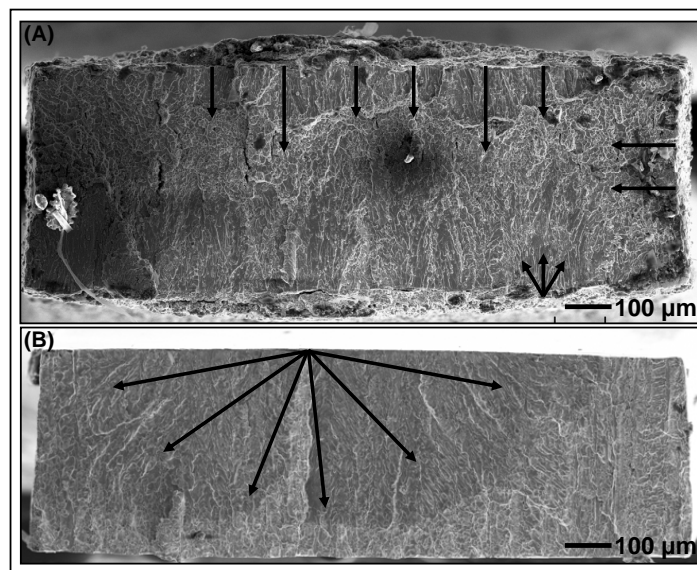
Fracture surfaces of (A) an as-received specimen (B) a polished specimen[31]
